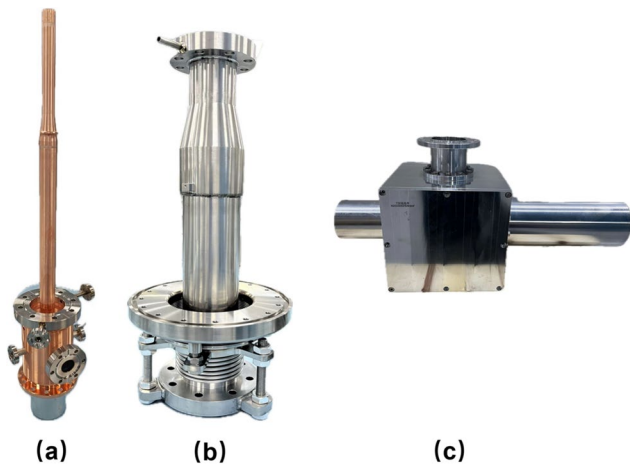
(Color online) Three main assemblies for the QWR coupler. (a) Dual-disk warm-ceramic-window assembly and inner conductor. (b) Coaxial transmission section of the vacuum side. (c) T-box
